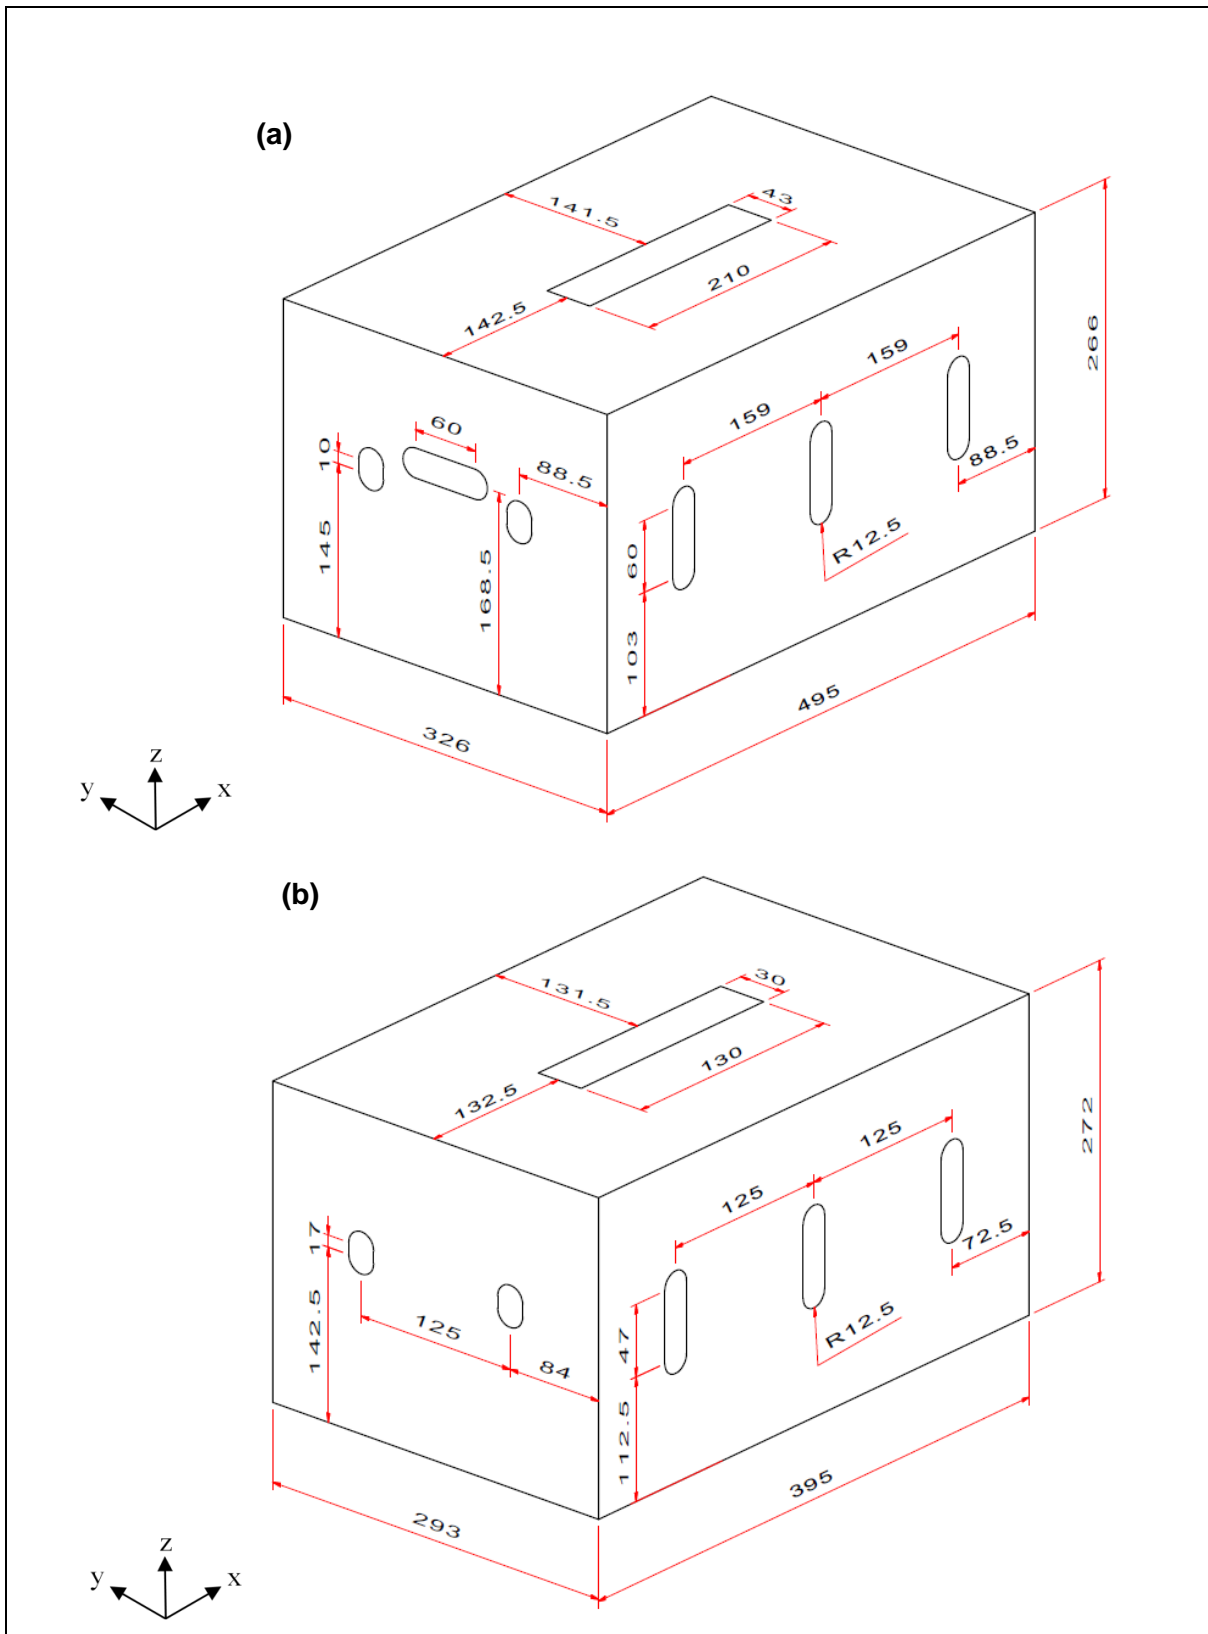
Geometry and dimensions of the (a) MK4 and (b) MK6 packages in mm.
